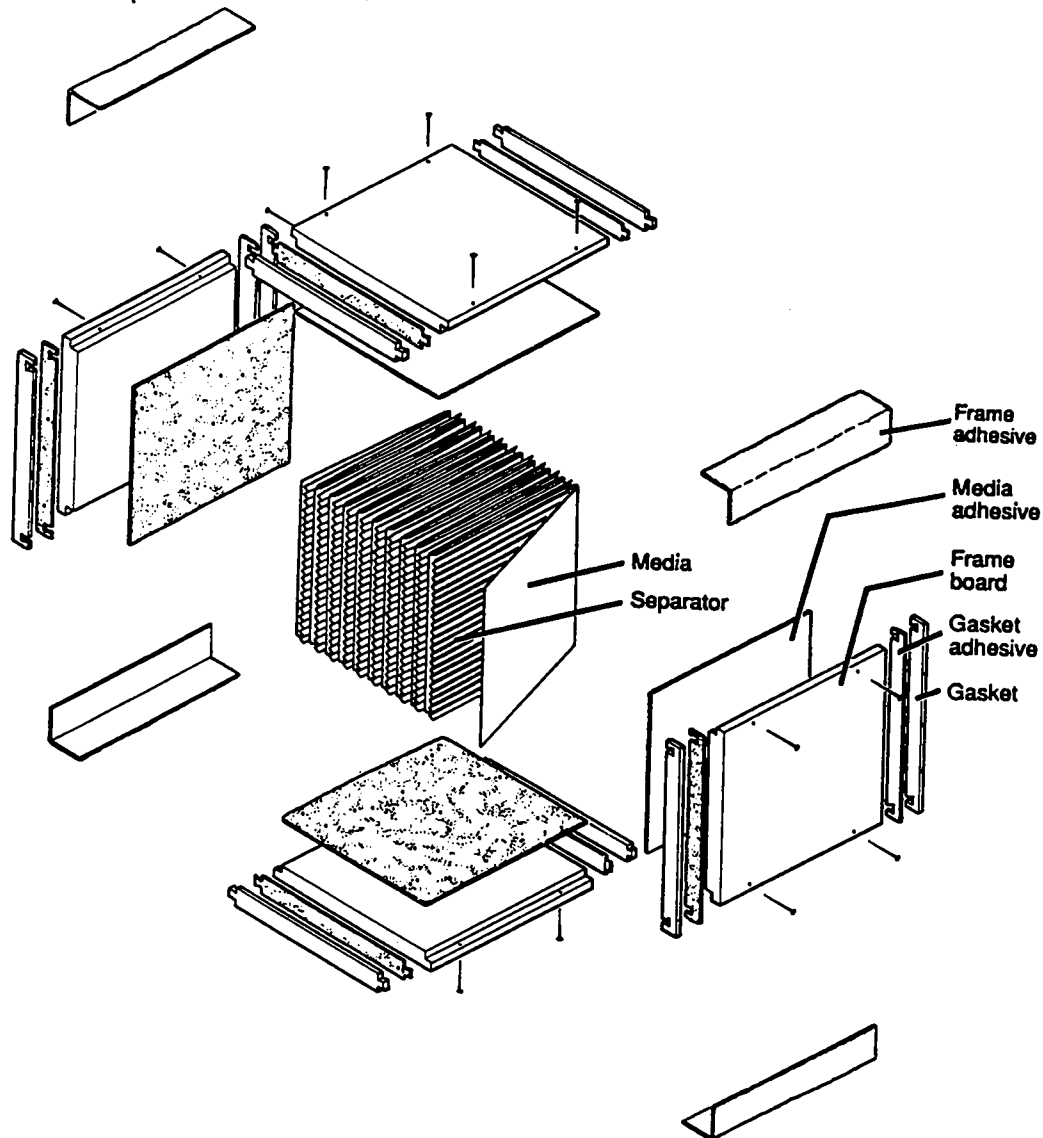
An exploded view of a HEPA filter unit showing the individual filter components. The media pack consists of a folded sheet of media with separators placed in the folds. The frame is made from frame boards with gaskets sealed to the edges of the boards.
